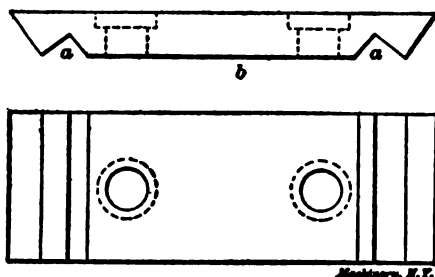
Methods Used for Accurately Finishing a Milling Machine Knee
